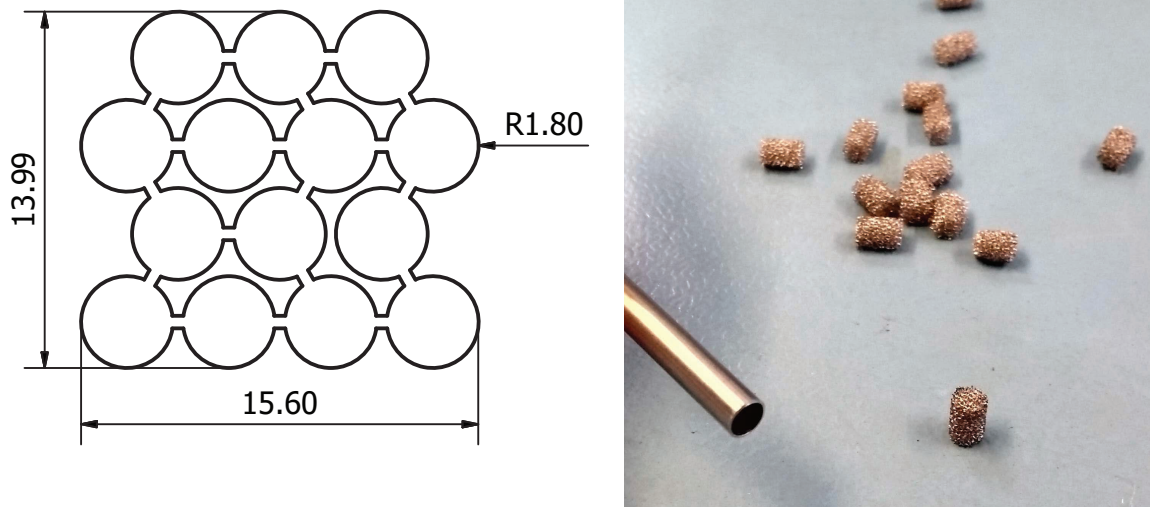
The cutting pattern used for the foam inserts (left) and the resulting components next to the steel tube they are to be inserted into (right).
